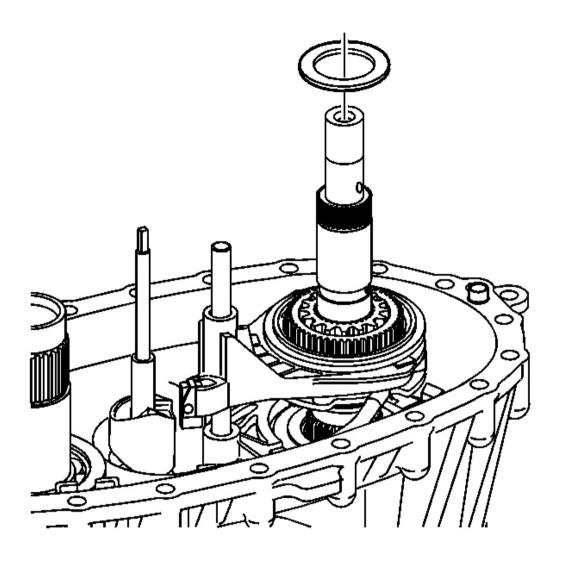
Drive Sprocket Thrust Washer Courtesy of GENERAL MOTORS CORP.
